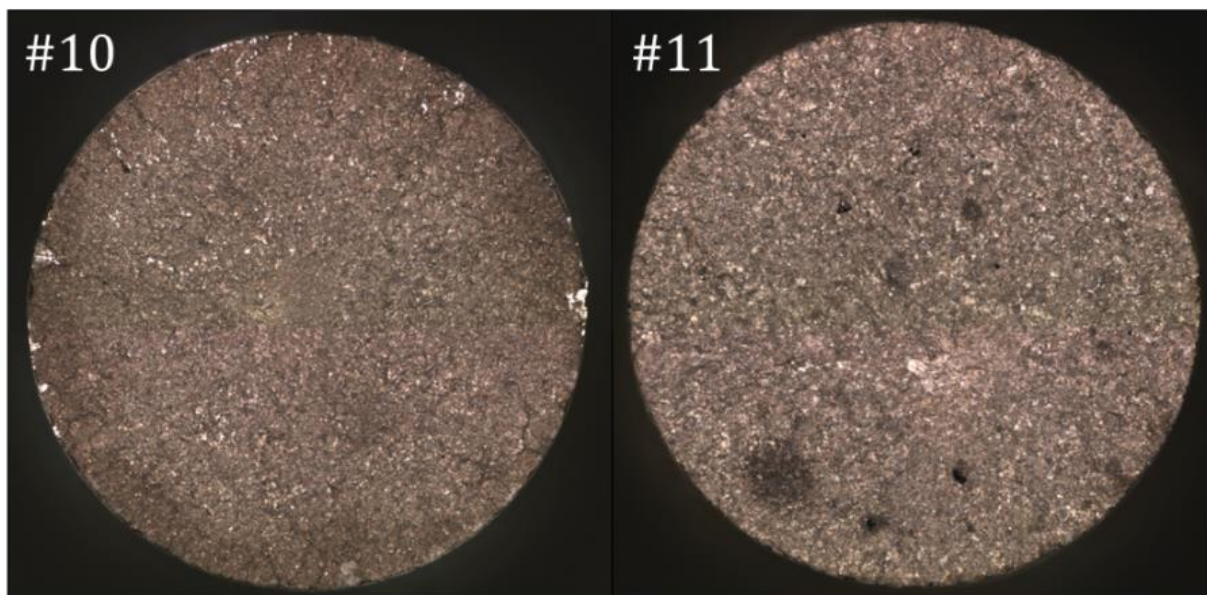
Left: Fracture surface of specimen #10 that exhibited a yield point during the 4 K tensile test. Right: Fracture surface of specimen #11 that failed in the linear elastic portion of the 4K tensile test shows some black colored defects on the fracture surface.
